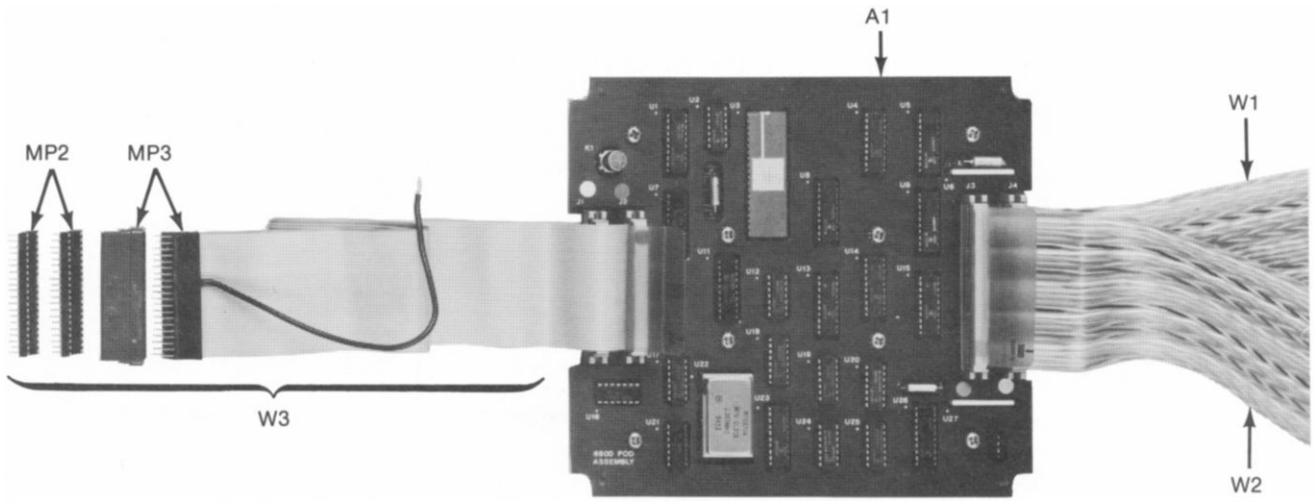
6800 Illustrated Parts Breakdown (Sheet 2 of 2)
